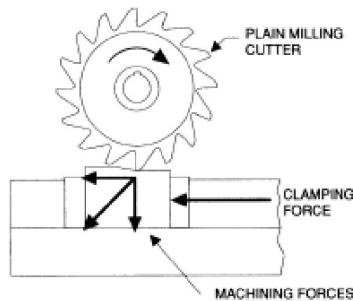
Cutting forces in a milling operation should be directed into the solid jaw and base of the vise.
